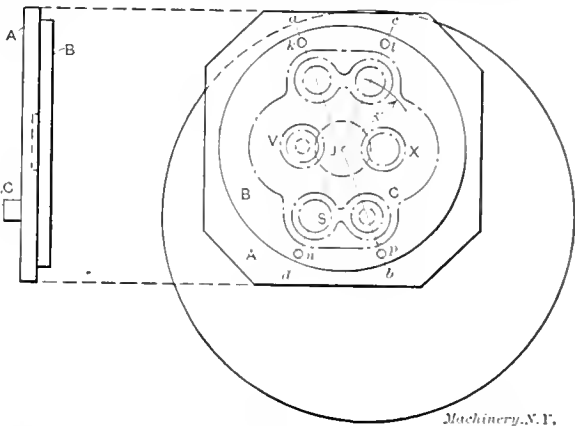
Diagram of Fixture for Holding Double-cylinder Casting.
